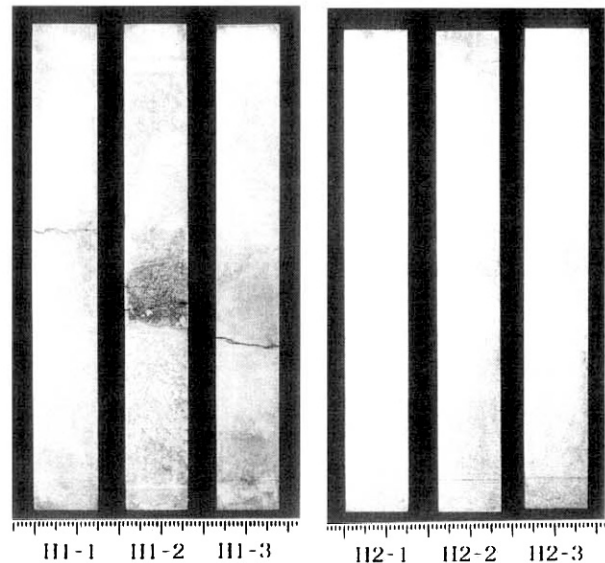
Face view of sulfide cracking of FCA weldment after SSCC Test (Left: cap pass Area - crack, right: root pass area - no crack)
